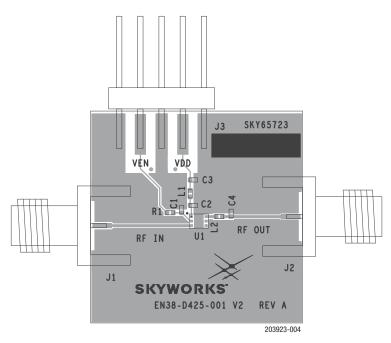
SKY65723-81 Evaluation Board Assembly Diagram
